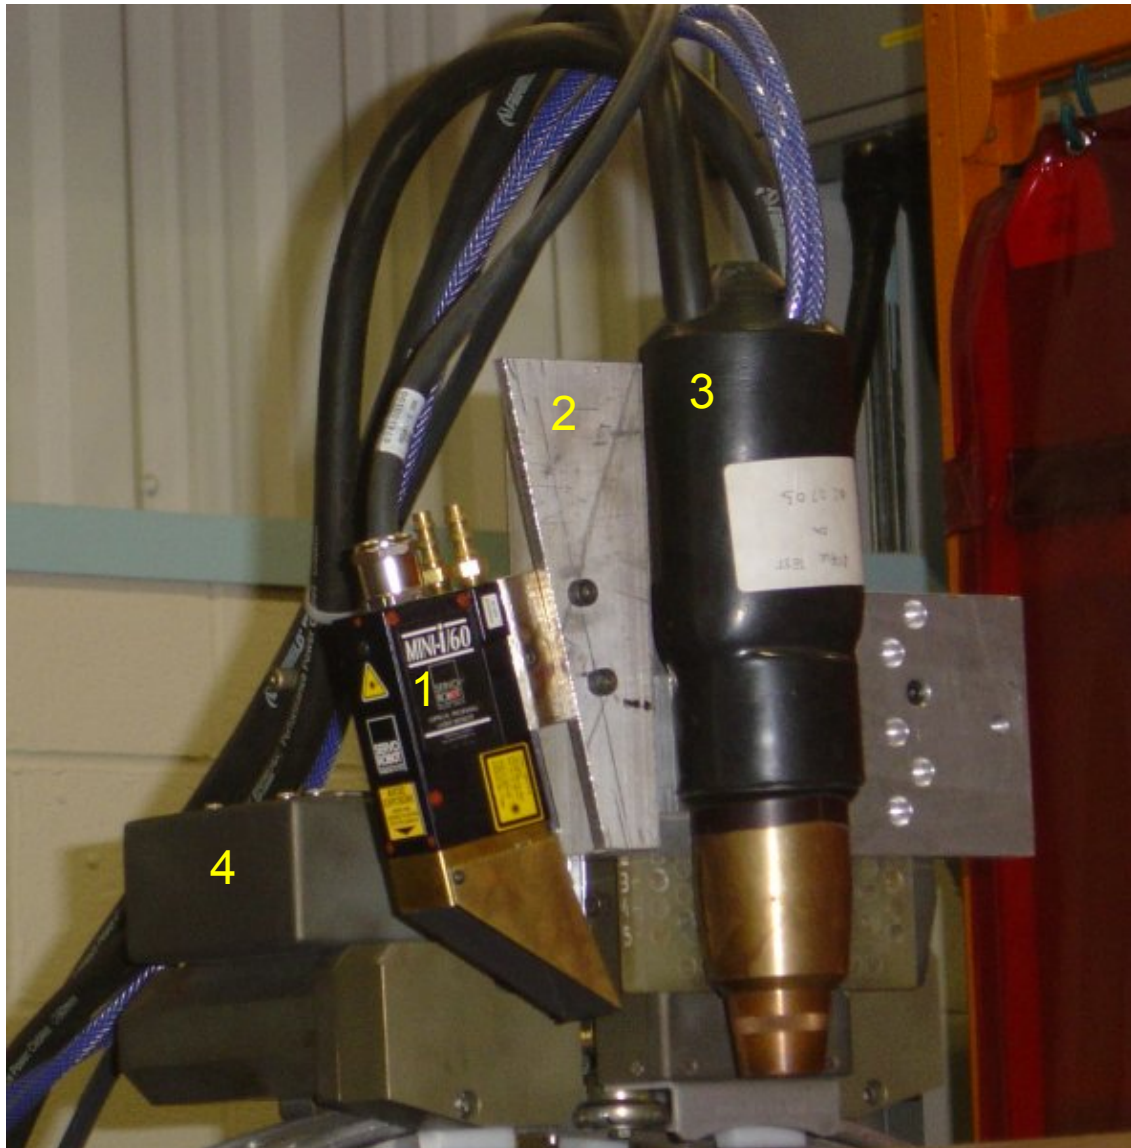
Welding head with laser sensor attached to the torch support.
